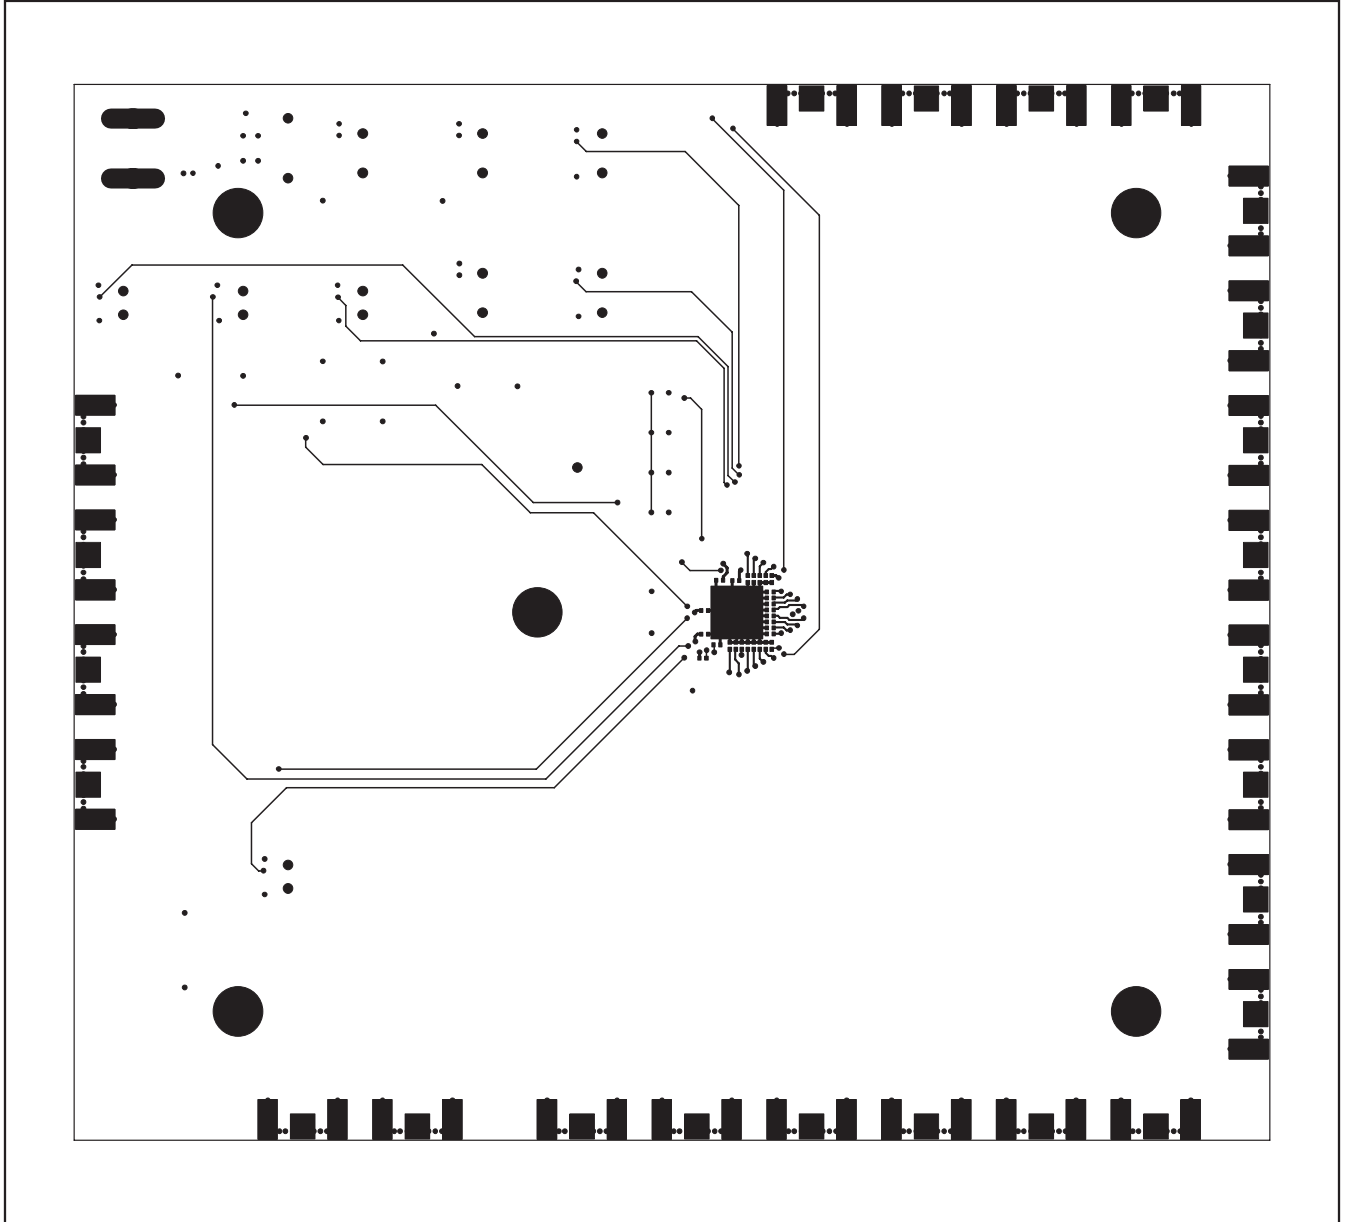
MAX3678 EV Kit PCB Layout—Solder Side
